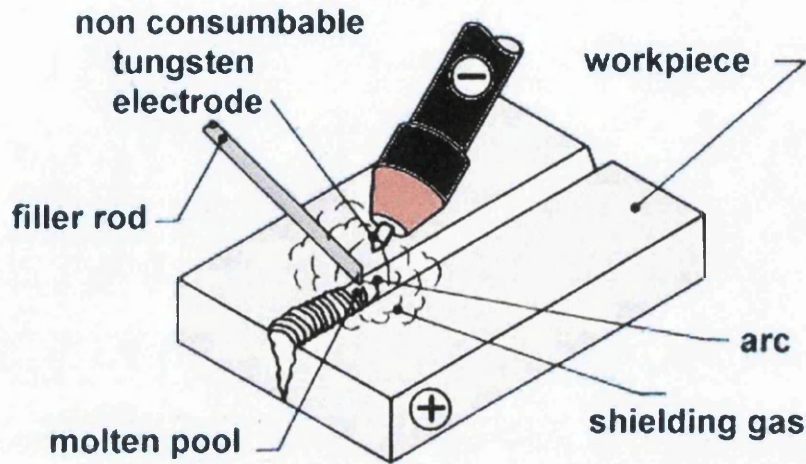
A schematic diagram of the TIG welding process.
